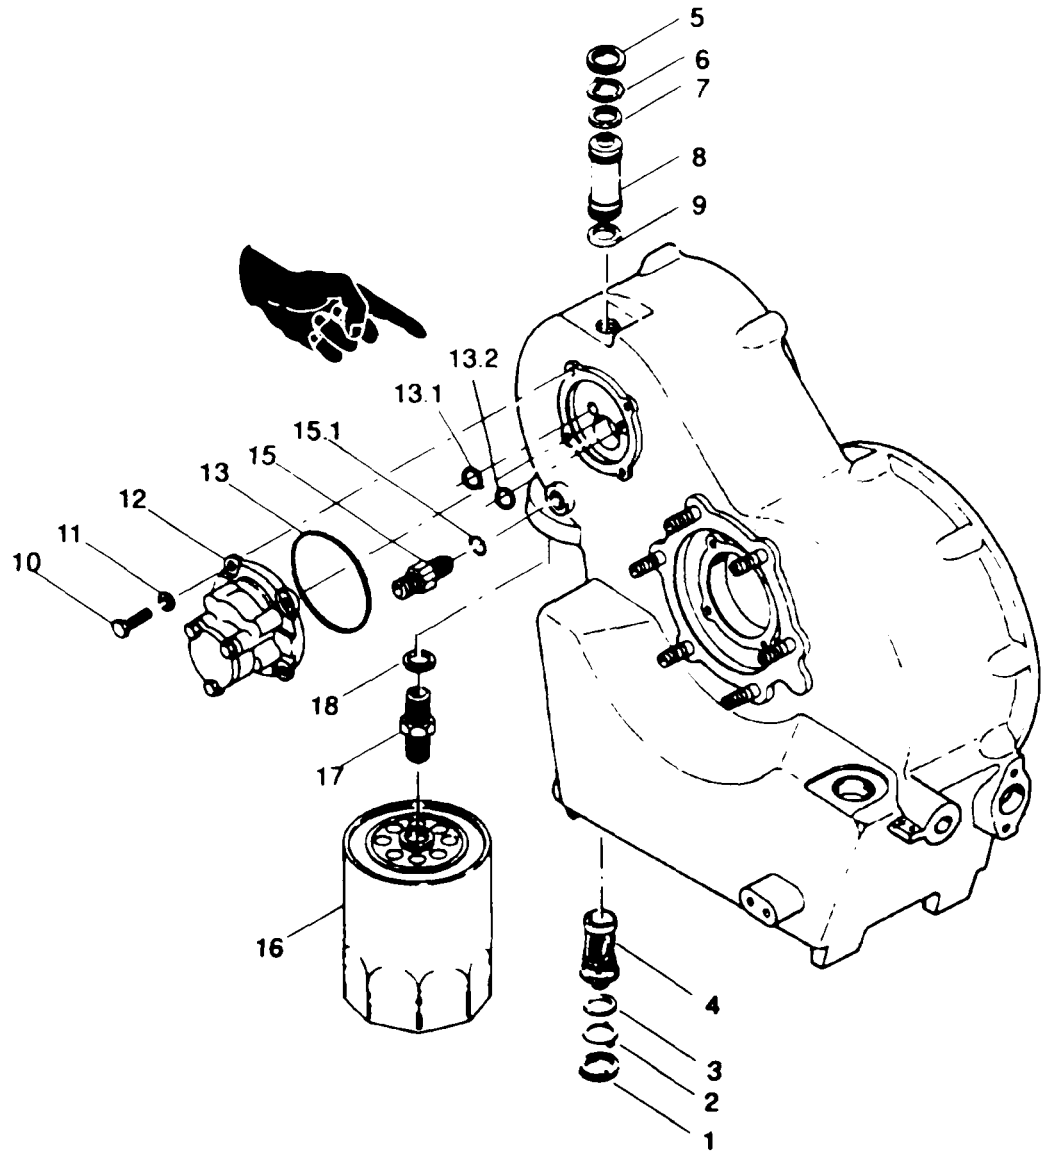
Preparing Gearbox Assembly for Disassembly Using Fabricated Tool FT-21343
